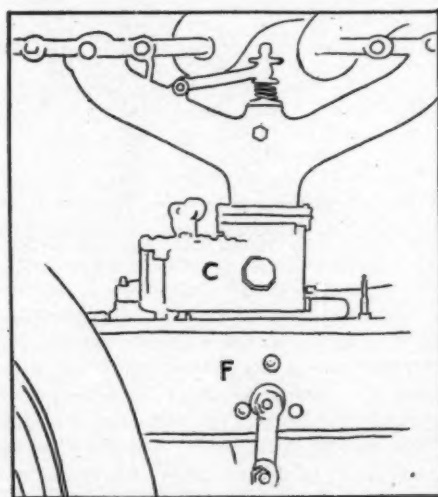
Carburetor of the Stearns Model 30-60, showing how it is partly below the chassis frame
